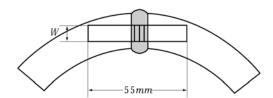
The position of selection for impact test specimen taken from the weld zone of electric-resistance welded steel pipes
